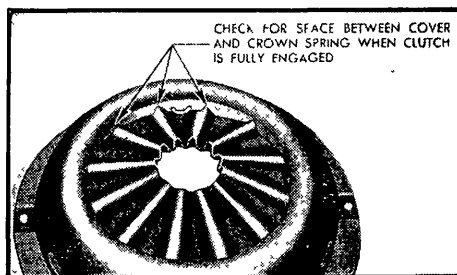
C Points to check contact of clutch spring with cover, 1939-52 Series 40, 50
